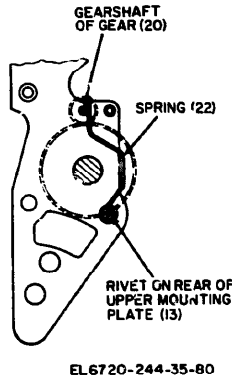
Spring location (spring (22), from fig. 3-9).
